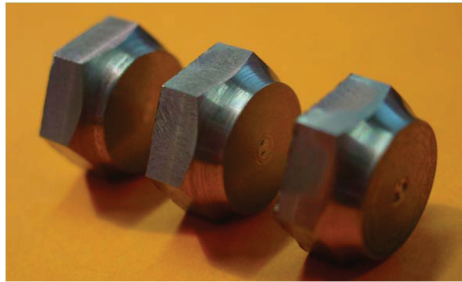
Tiles shaped by turning and milling, before the drilling of the bottom part [148].
